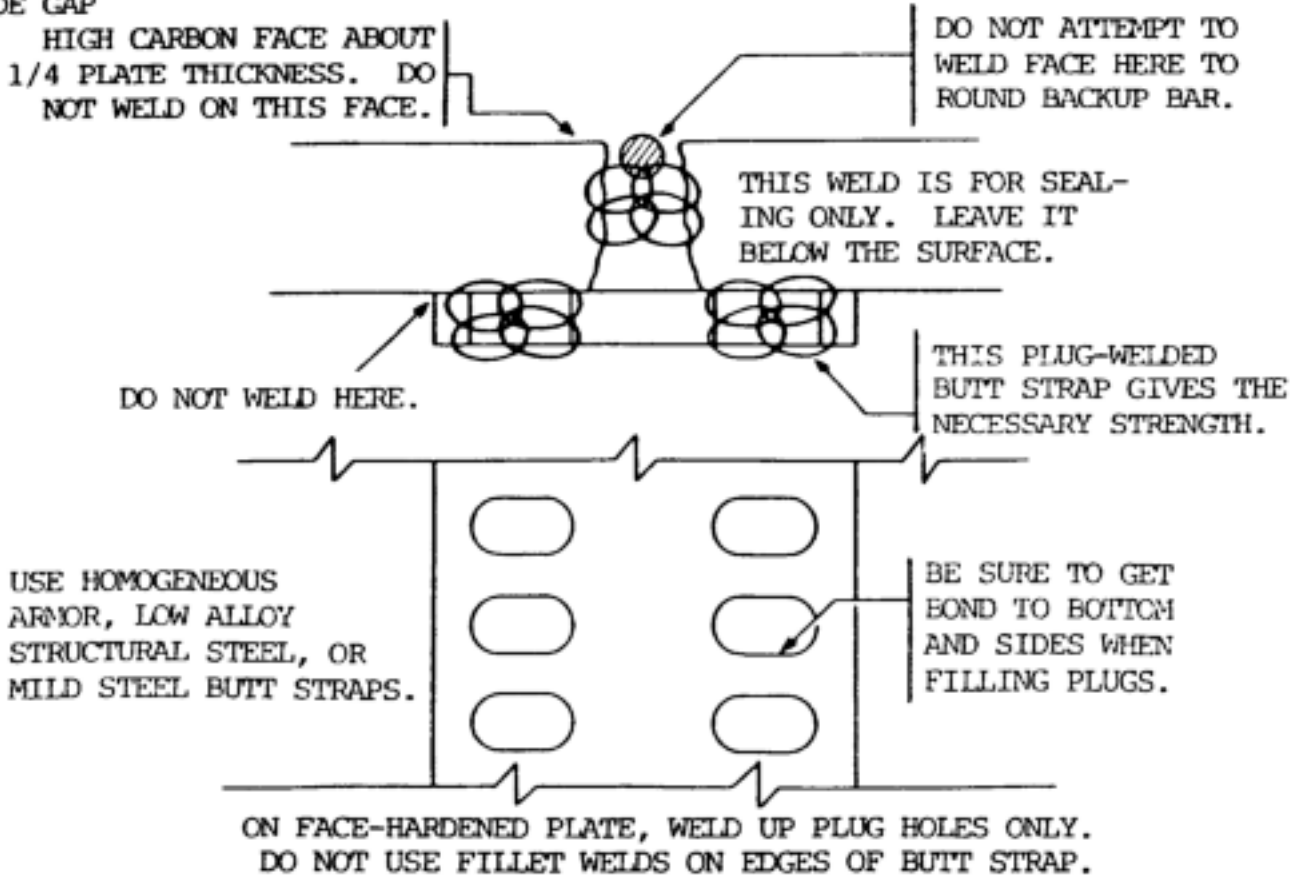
Use of butt strap on face hardened armor to repair cracks or gaps.
